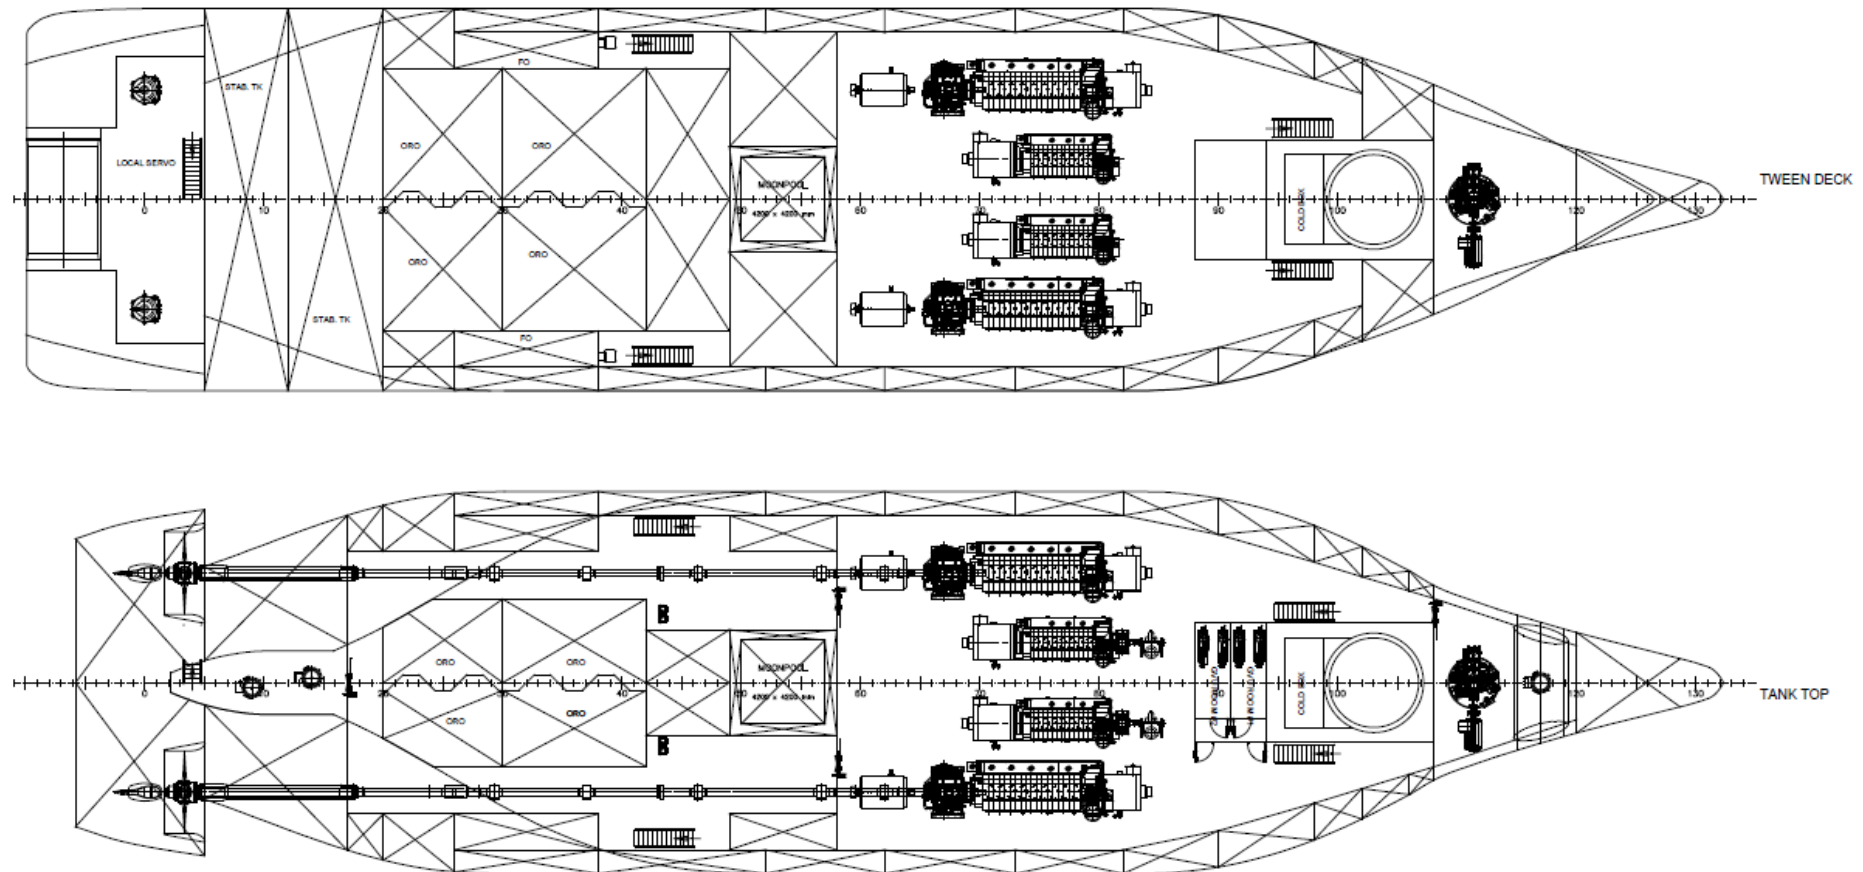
Vertical tank arrangement – Tank top / Tween deck
